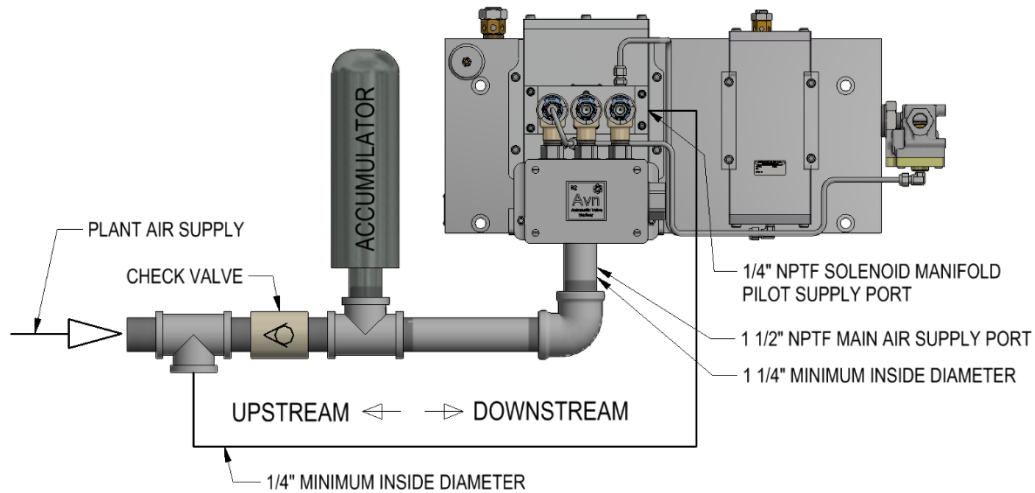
"Airpack" Mounted on MSIV Pneumatic Cylinder
